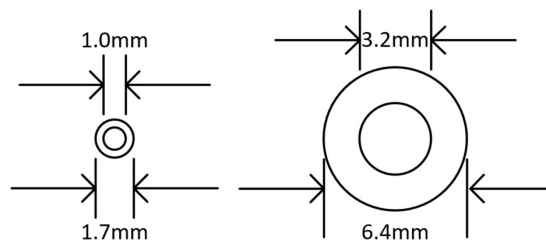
Dimensions of tie-point (left) and mounting hole (right).
